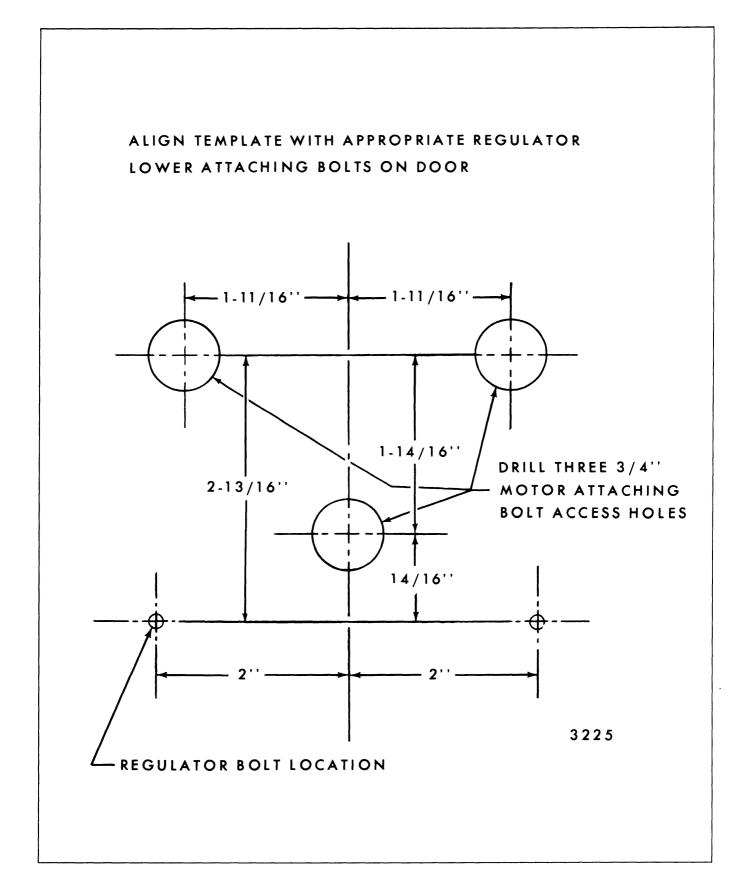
Window Regulator Lower Attaching Bolt Reference Points for Locating Window Motor to Regulator Attaching Bolts - "F" Styles (Full Page)
